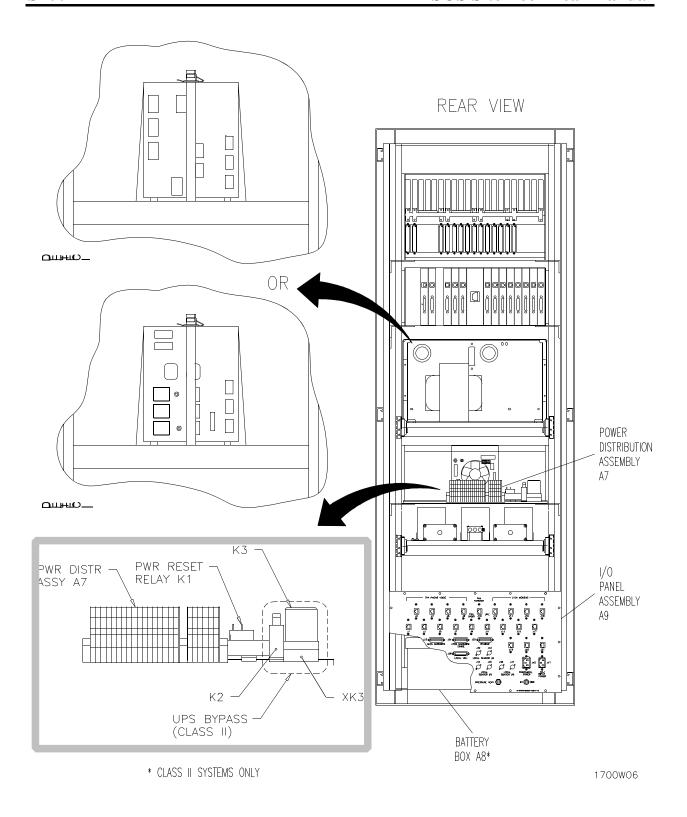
ACU Cabinet Unit 1 Locational View (Sheet 2)
